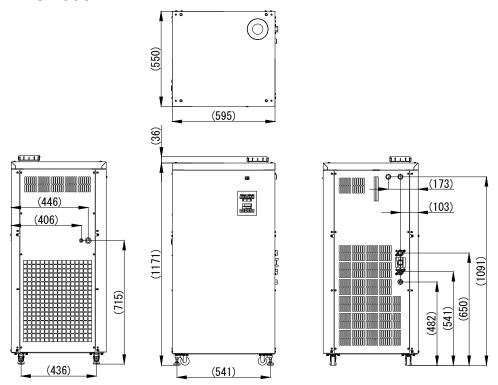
Outline Dimensions (fig.HRGC005-A)
